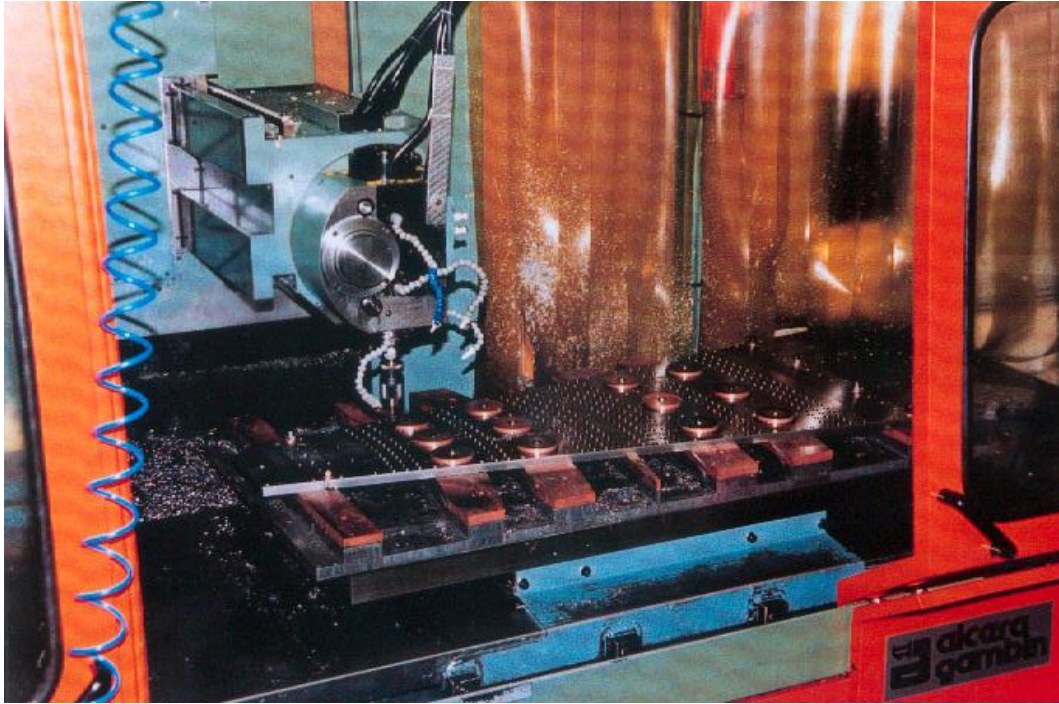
View of the computerised machining of the 2,000 holes for petal wiring, in the SRM (LAL).
